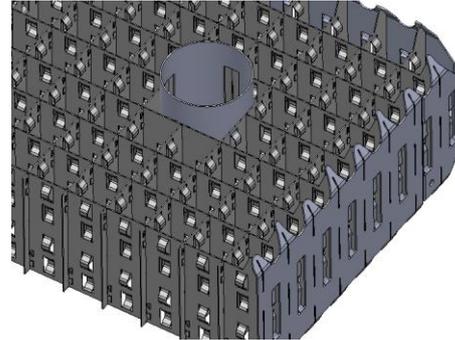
Cross Sectional View of HIPER16 Top Grid Assembly
